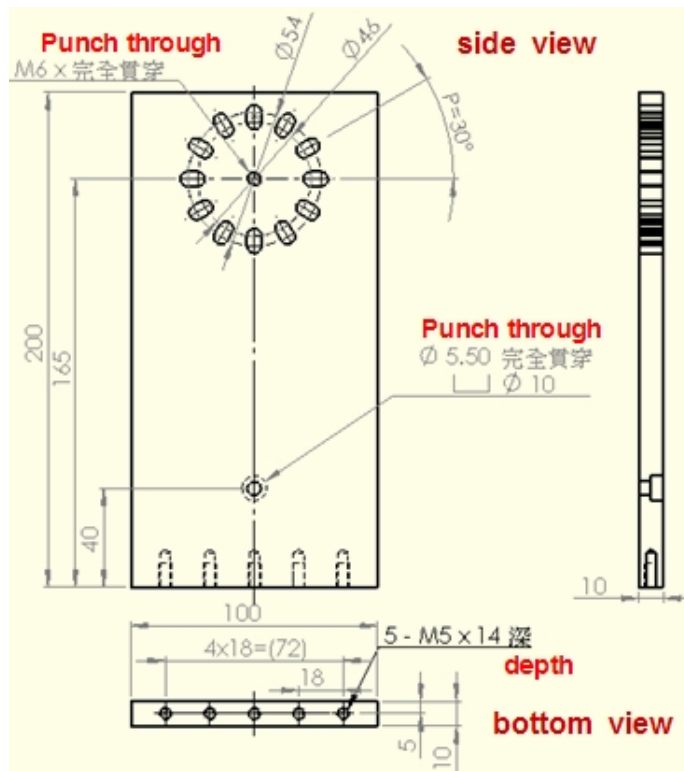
Engineering drawing of two long side plates standing on the bottom plate in Fig 92.
